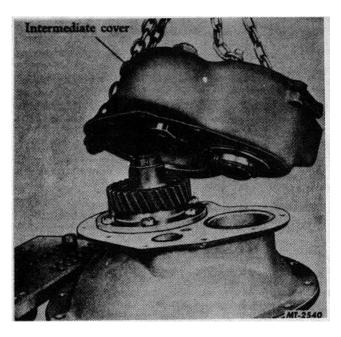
Removing Power Divider Intermediate Case Assembly.
